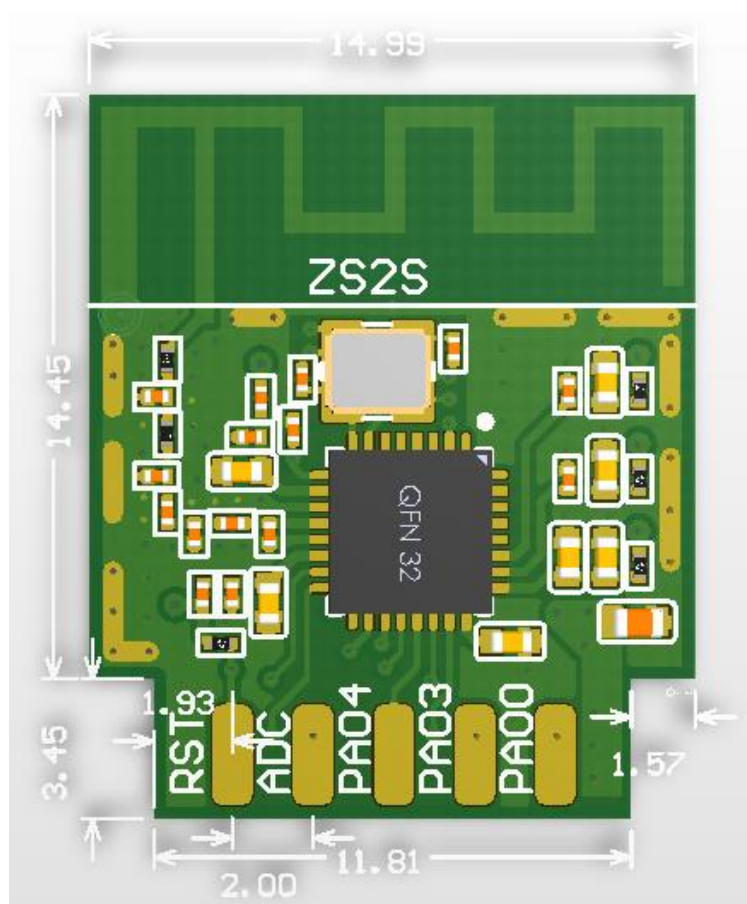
ZS2S mechanical dimensions and rear solder pad dimensions
